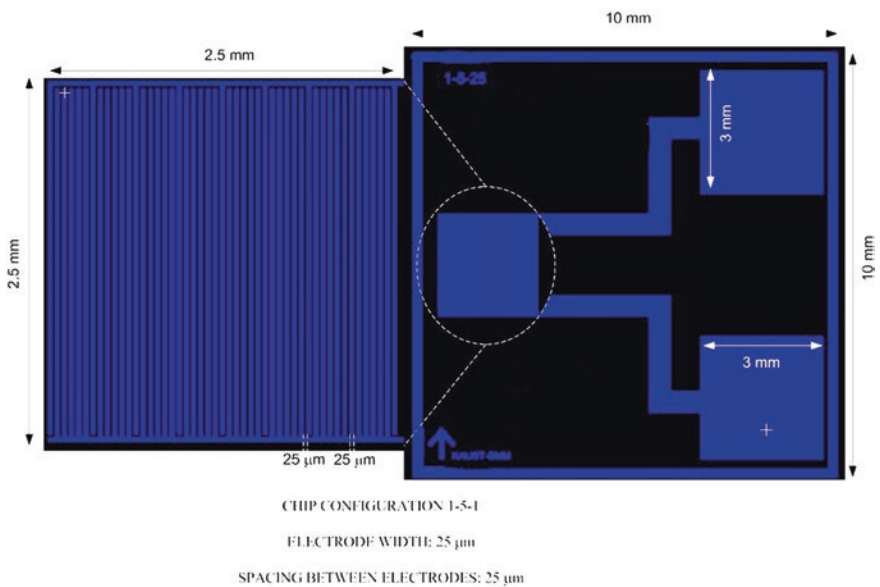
1-5-25 sensor: basic design geometry and dimensions
